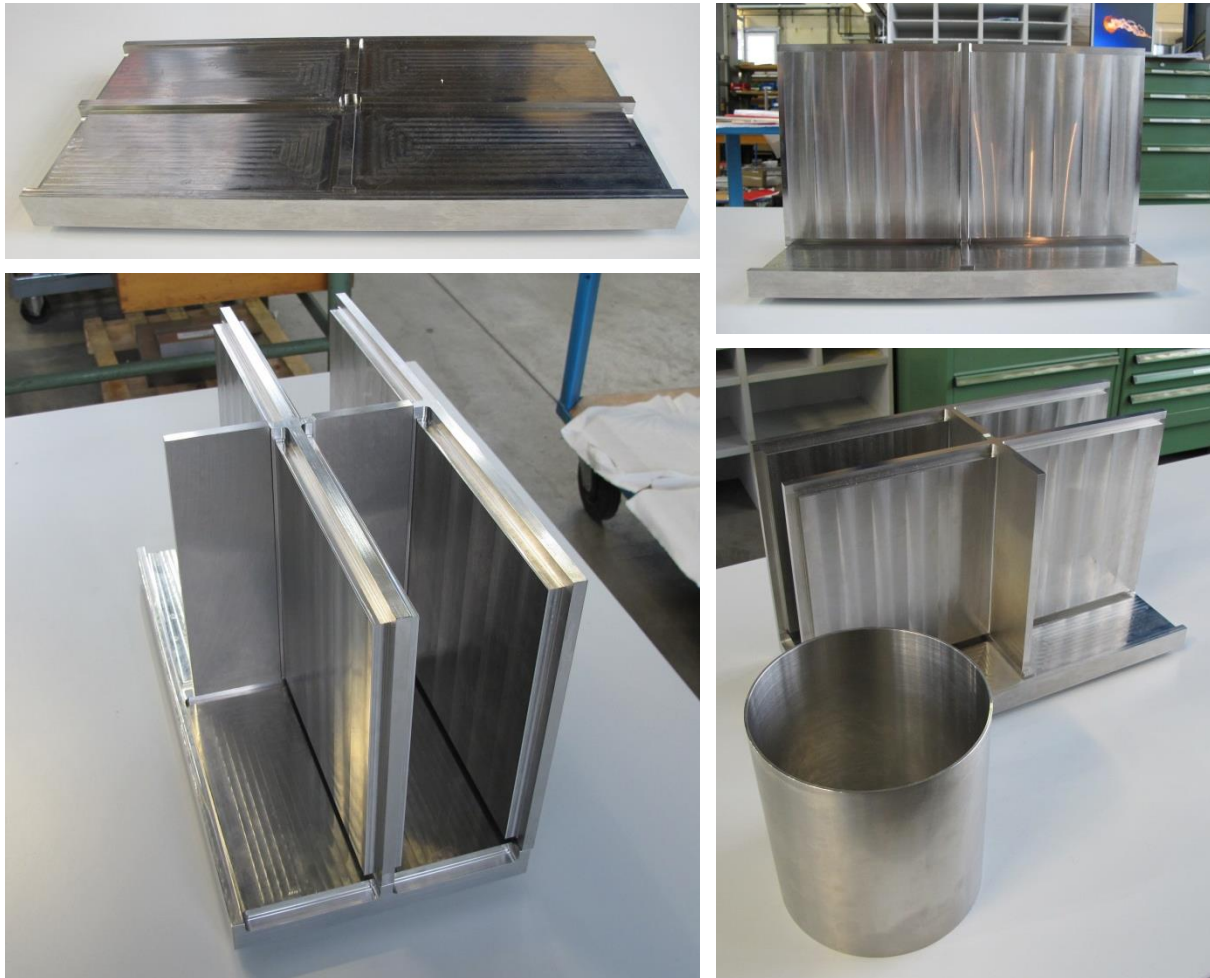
Reduced-sized mock-up: Manufactured parts before assembly by electron beam welding.
